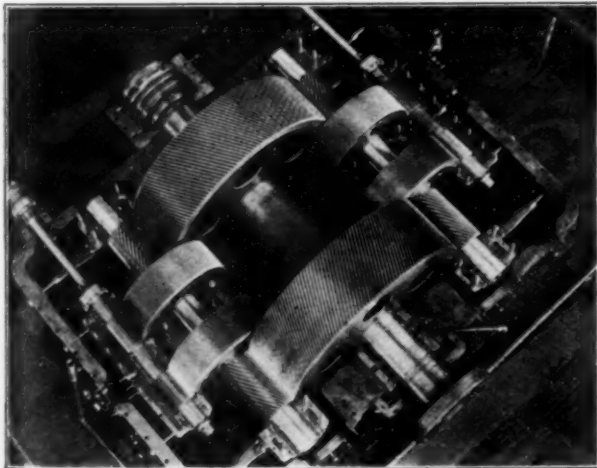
3000-S.H.P. MARINE REDUCTION GEAR
